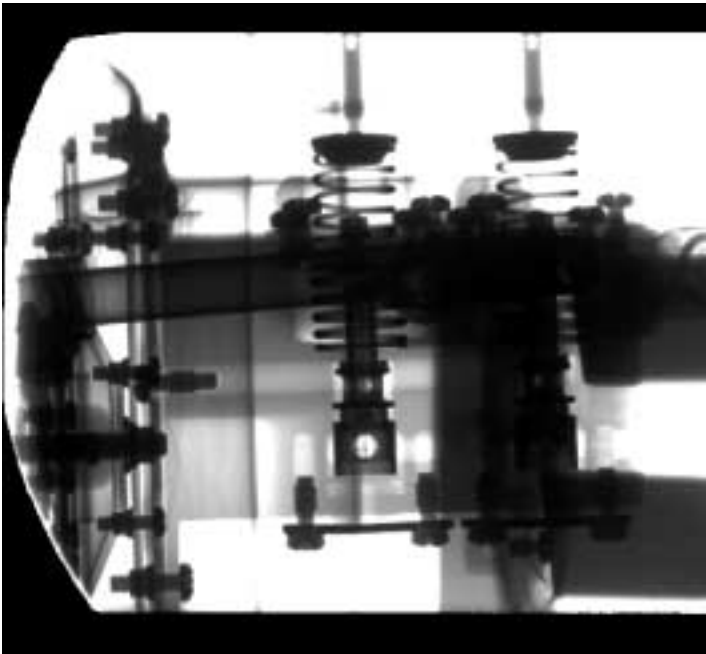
Upper Pressure Relief Valve, control assembly, x-ray.
